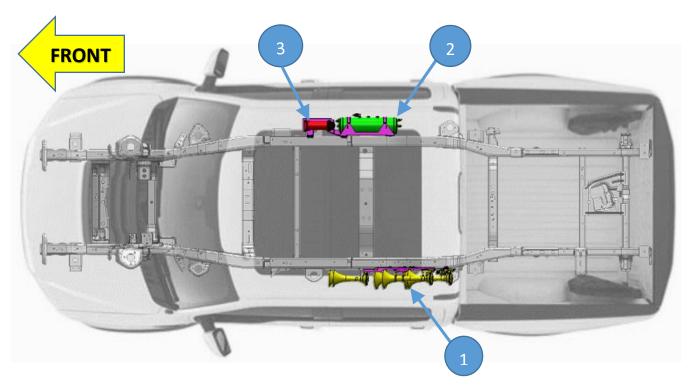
Top View showing Kit Layout (2018 Crew Cab Shown)
